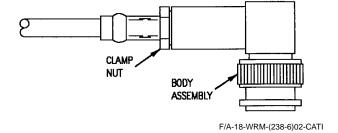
31-34179-2 Twinax Connector Repair (Sheet 3)
